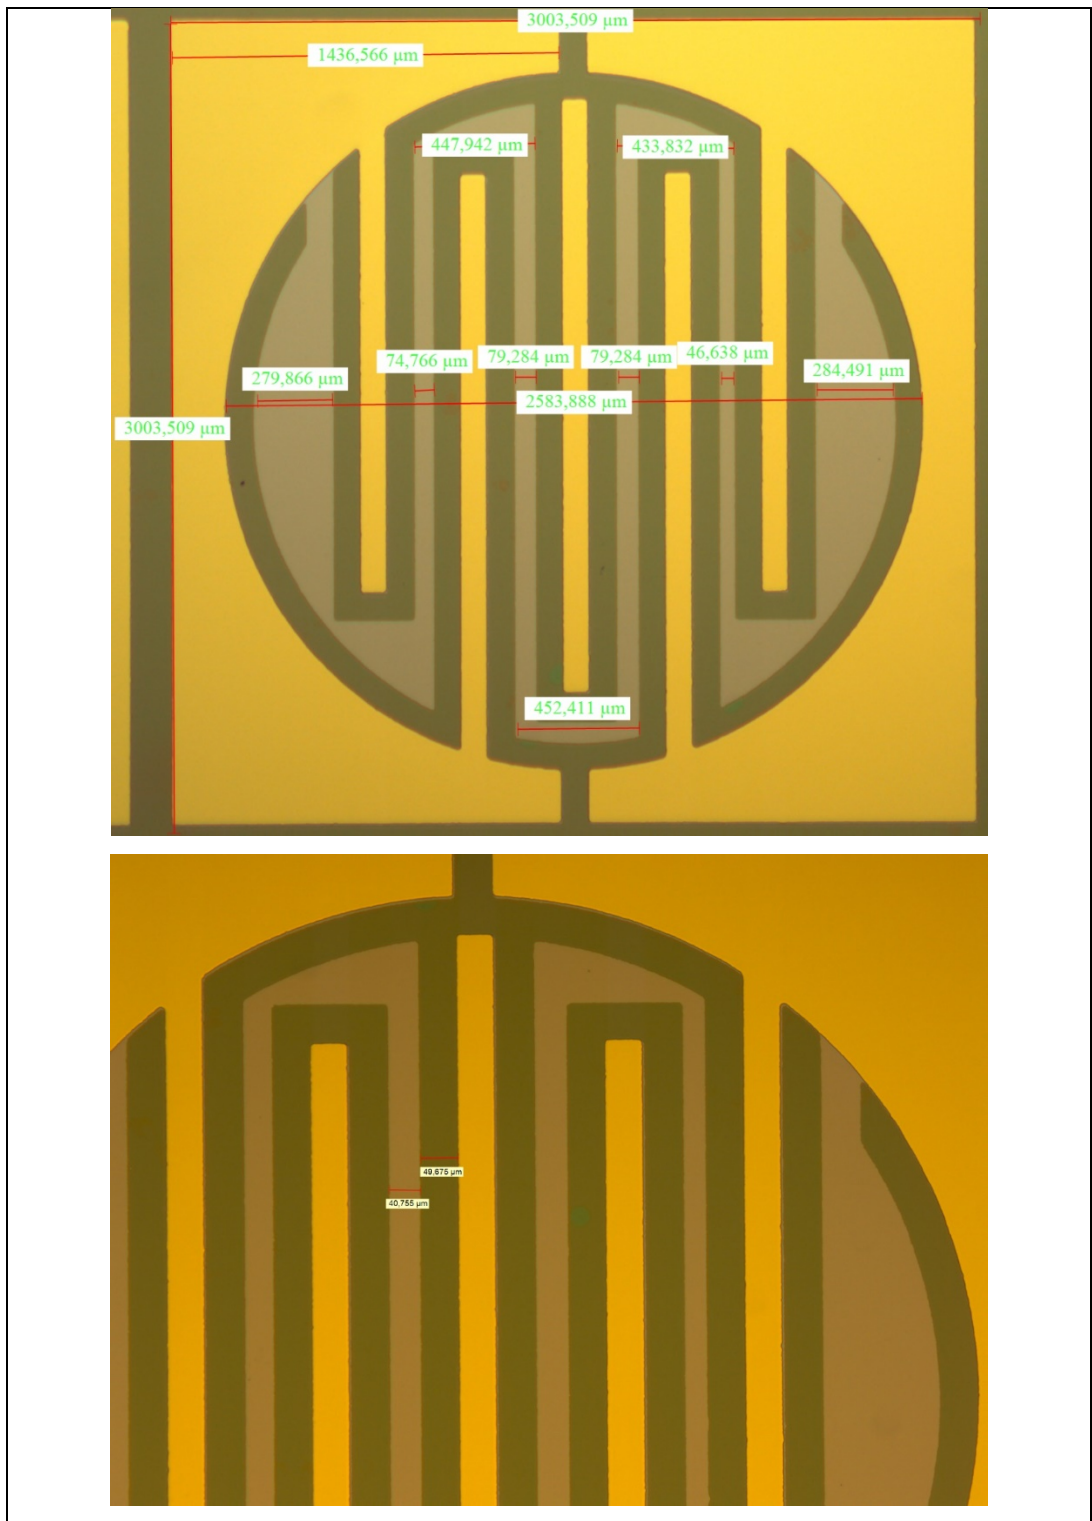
Dimension measurements of fabricated resistor with $100 \mu\text{m}$ line spaces using an optical microscope.
